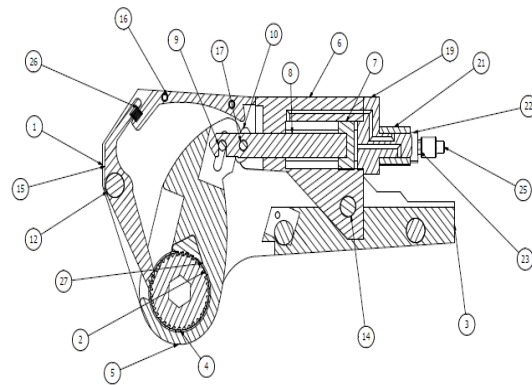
Sectional View of Assembly of Low-Profile Hydraulic Torque Wrench
